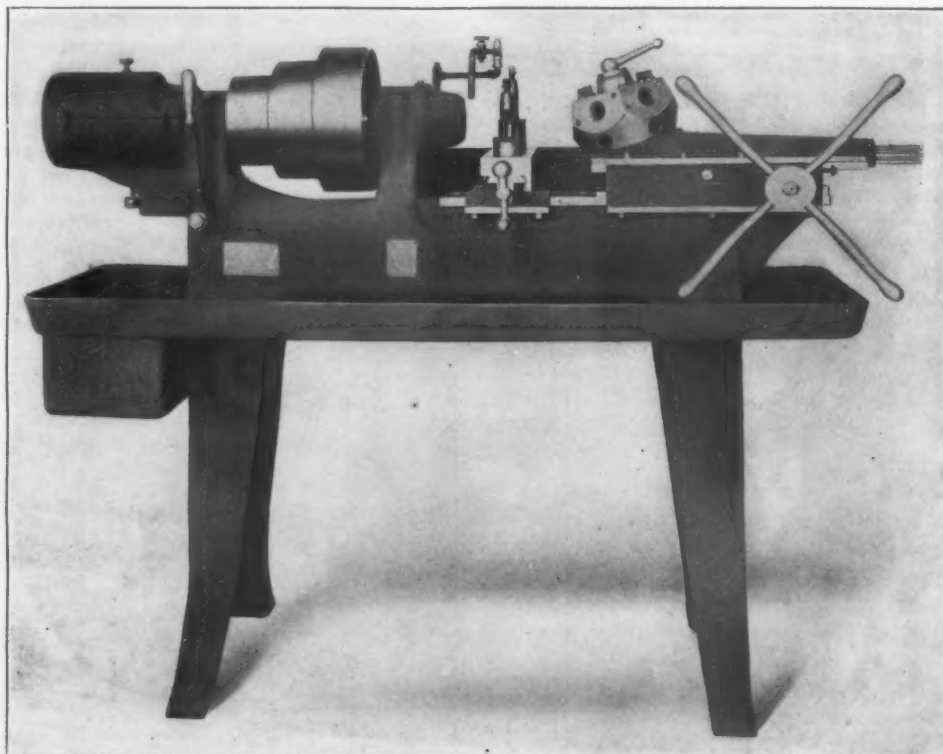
The Improved Tilted Turret Screw Machine Built by the Wood Turret Machine Company, Brazil, Ind.
